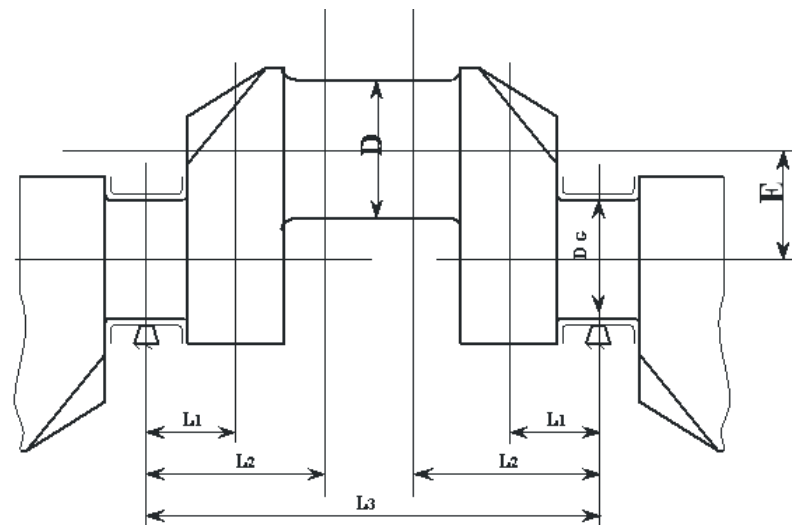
Crankthrow for V-type engine where in a common crankpin are installed two connecting rods
